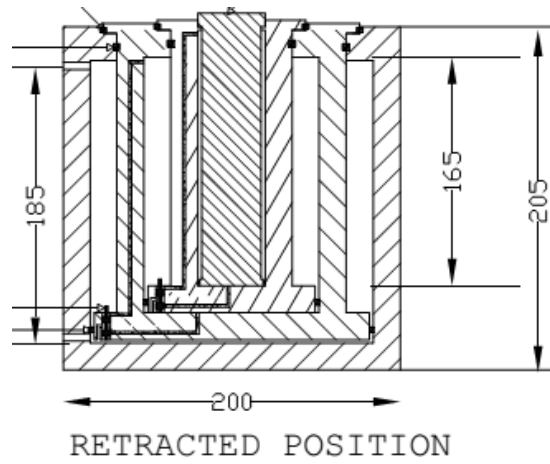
Detailed dimension drawing of the Telescopic Hydraulic Jack
